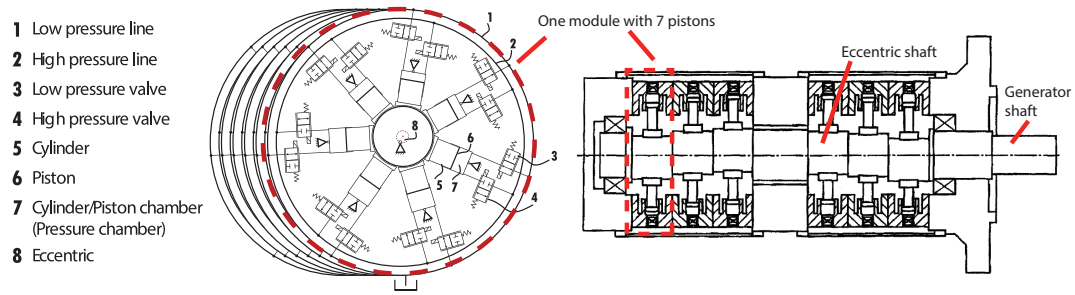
Left side: Front view sketch of a DD motor Sniegucki et al. [2013],[Pedersen, 2016b] (modified). Right side: Cross sectional sketch of a DD motor [Kazuhisa, Tsutsumi; Atsushi, Maekawa; Masayuki, Shimizu; Stephen, Salter; Uwe, Stein; William, Rampen; Robert, Fox; Hauke, 2010] (modified)
